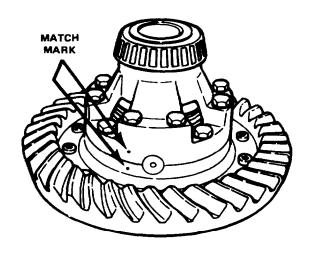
Removing Differential and Gear Assembly D. Using a suitable and safe lifting fixture, lift out the main differential and gear assembly from carrier (Figure 11-86).
